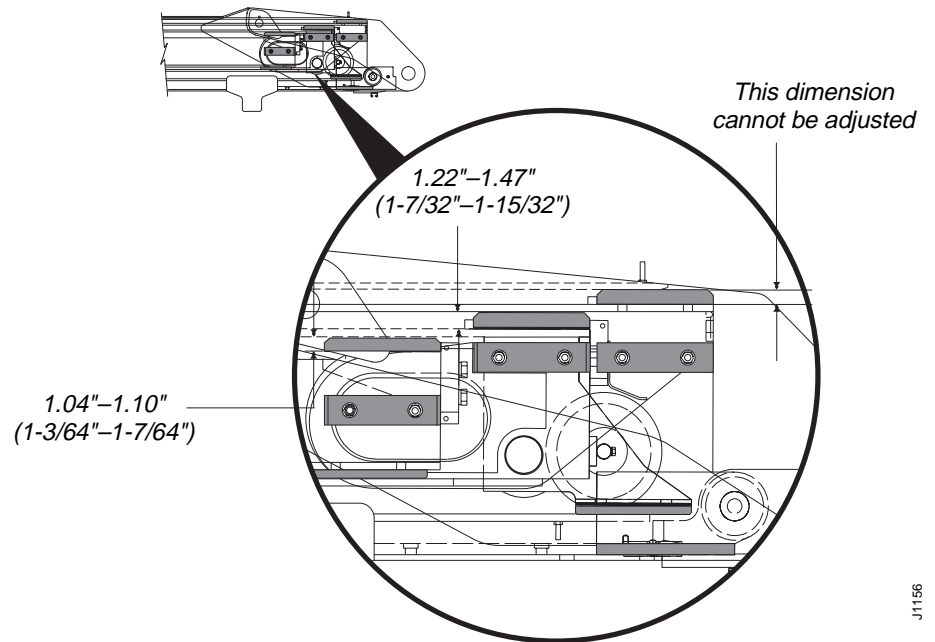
Boom Section Gaps – Rear of 4-Section Boom
